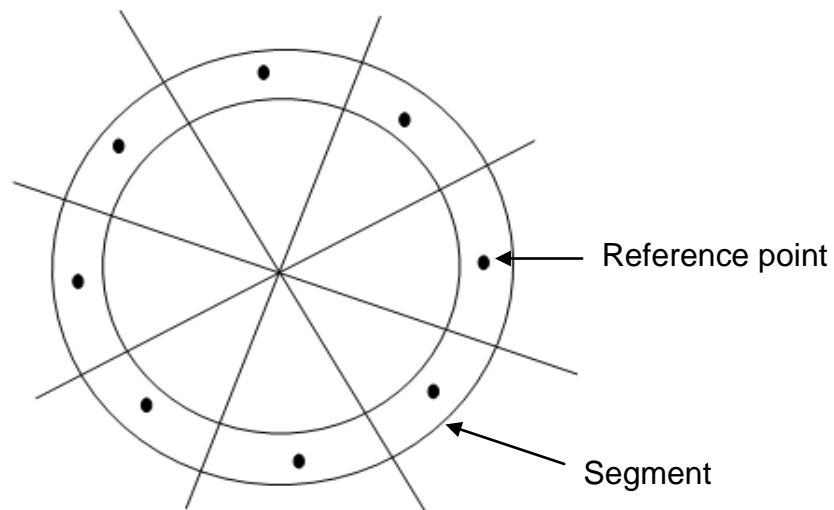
An example of drawing shows a metal tube cut into segments and drilled hole
